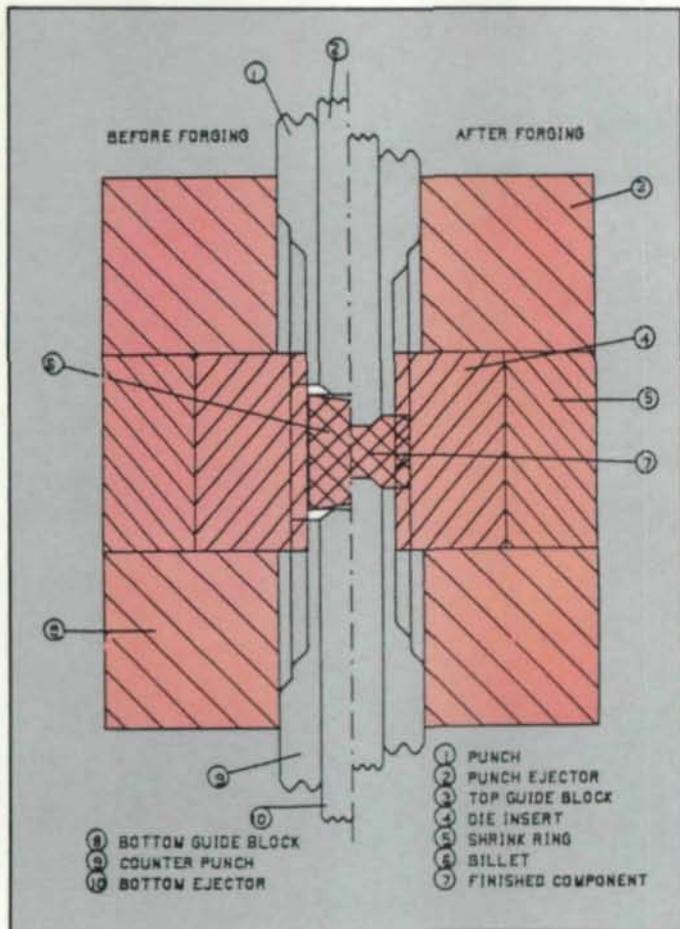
Typical Tool Setup for Forging Spur or Helical Gears
